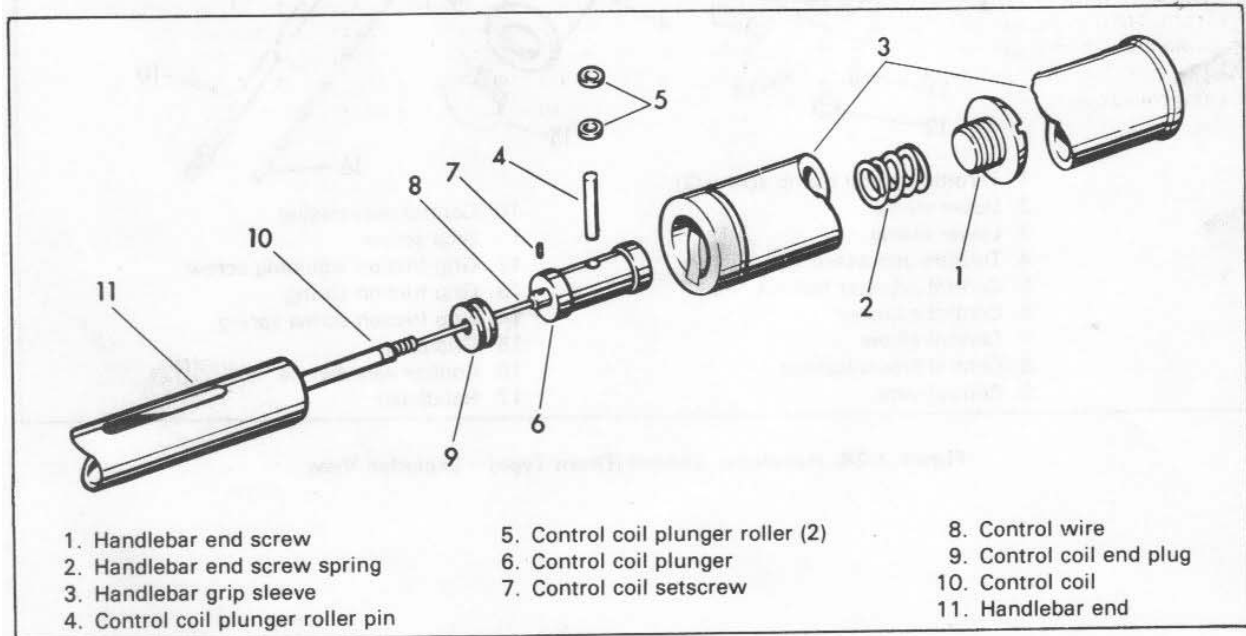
Handlebar Throttle Control (Spiral Type) - Exploded View
